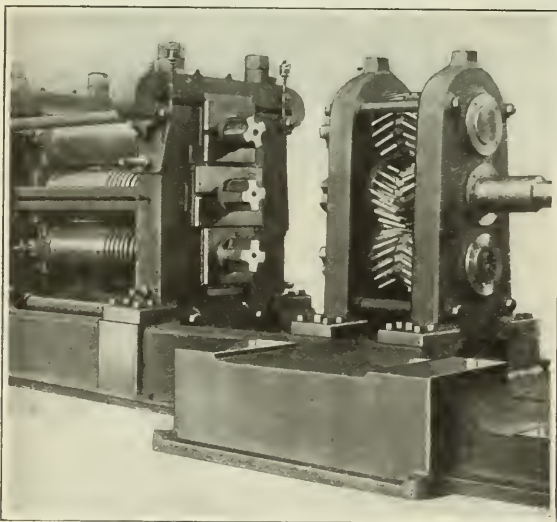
Close View of Herringbone Driving Pinions, Housings, Bearings and Rolls
